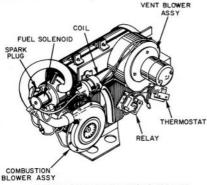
SKETCH OF TRANSPORTER HEATER".
